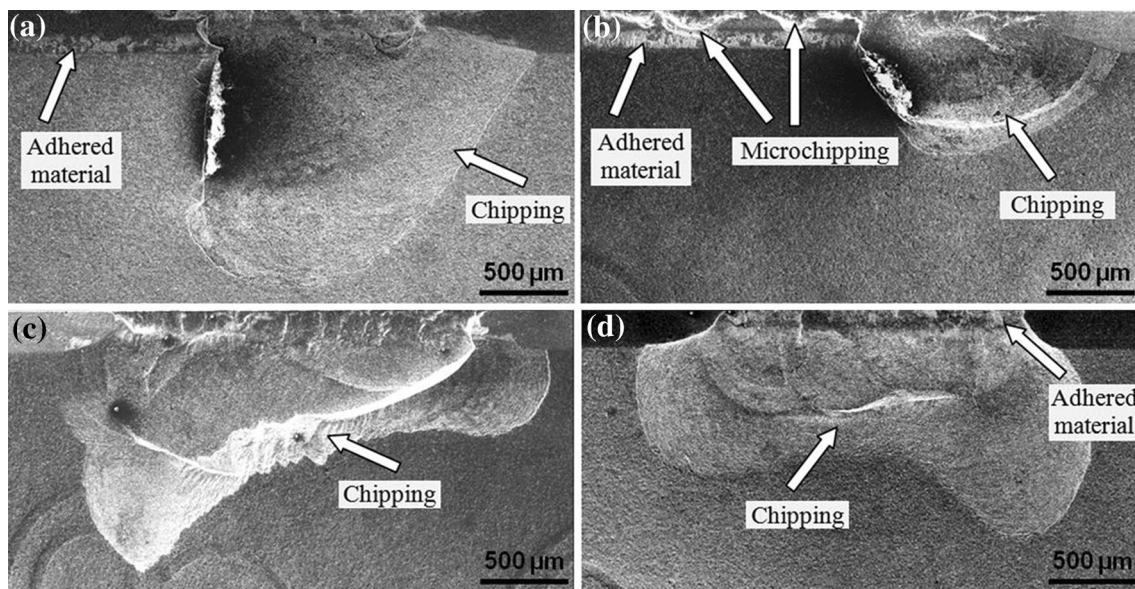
Tool rake face damage for S-shaped tools with high CBN content
